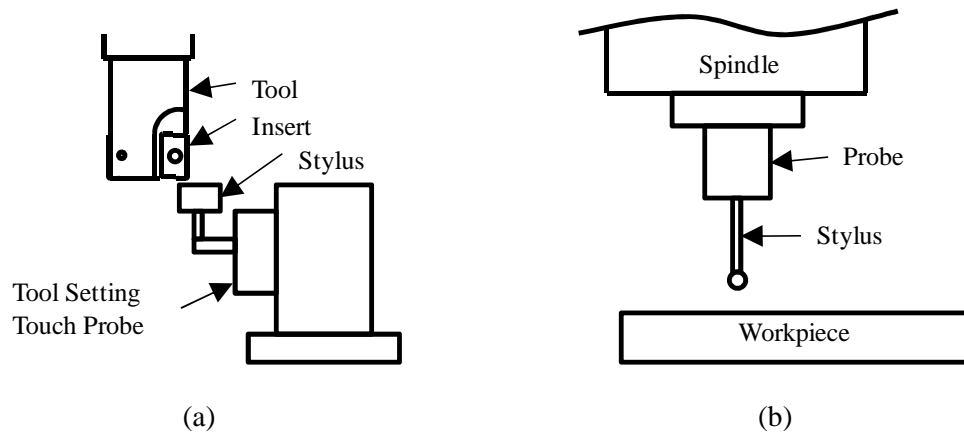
(a) Tool setting touch probe and (b) spindle touch probe.
